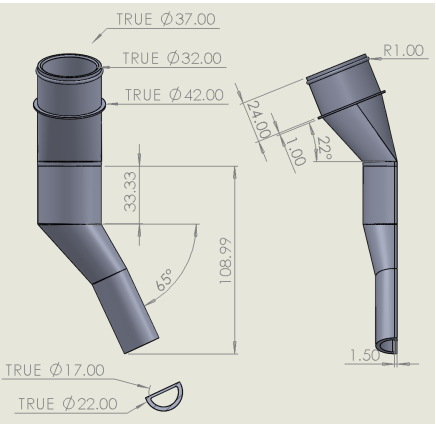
The SolidWorks design drawings for the 17 mm nozzle at angles 65°/115° with dimensions in mm.
